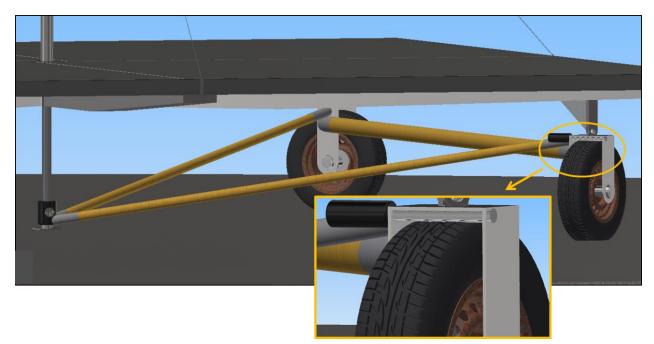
Carousel carriage with upcycled car wheels, bamboo tubes, and friction drive
